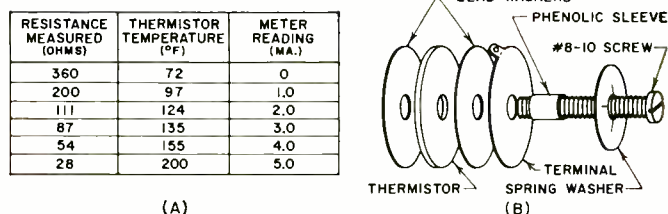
(A) Values for calibration. (B) Thermistor mounting.
